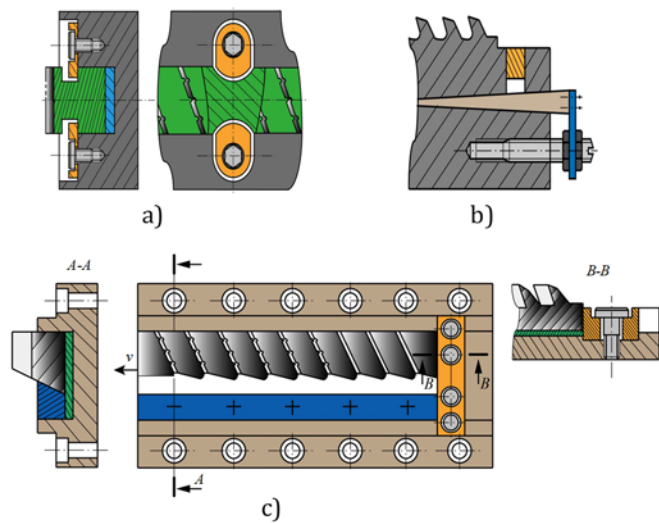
Examples of holding systems for broaching tools: a) symmetrical clamps, b) system allowing the height adjustment to compensate for broach resharpening and c) system for broach with inclined cutting edges [25, 89].
